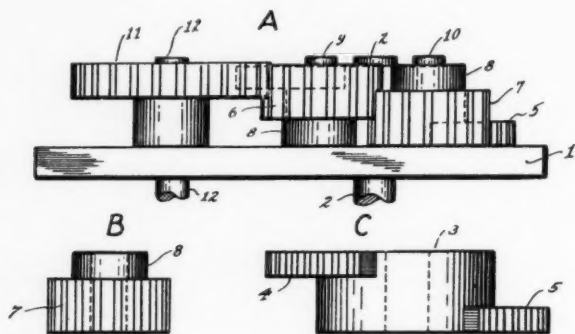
A—Arrangement of gears. B is one of the intermediate gears, which contact C, the driver made up of toothed segments not in the same plane
